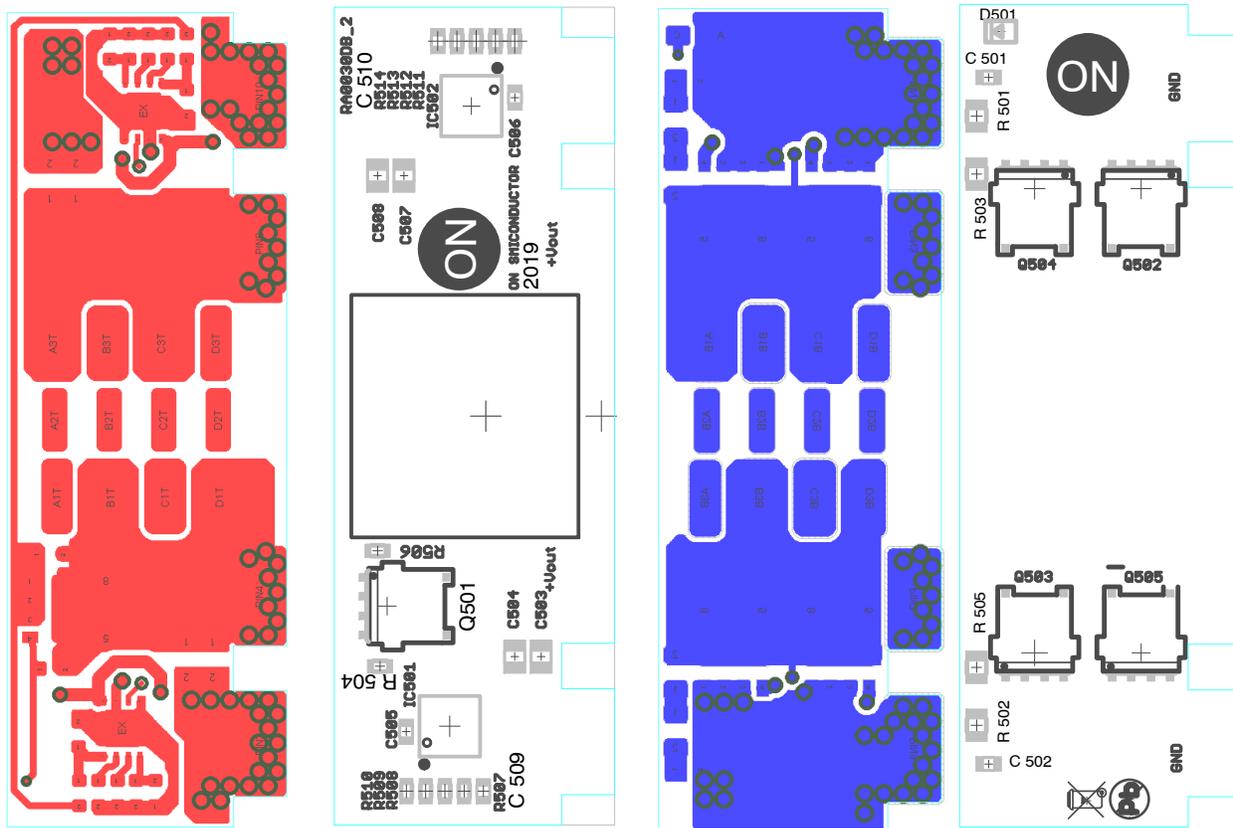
Top/ Bottom Layer PCB Layout and Assembly Plan of SR MODULE MOD104
